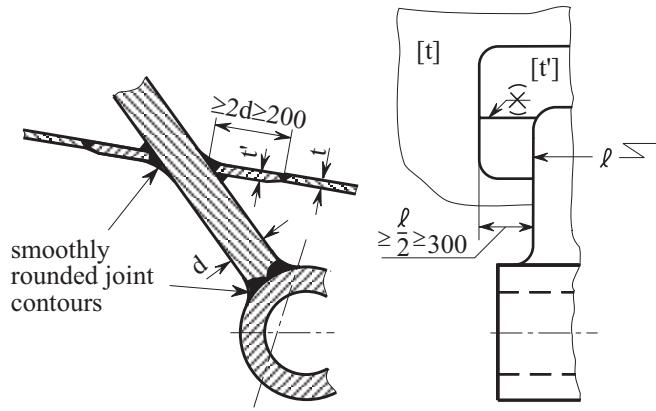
Shaft bracket with integrally cast welding flanges
